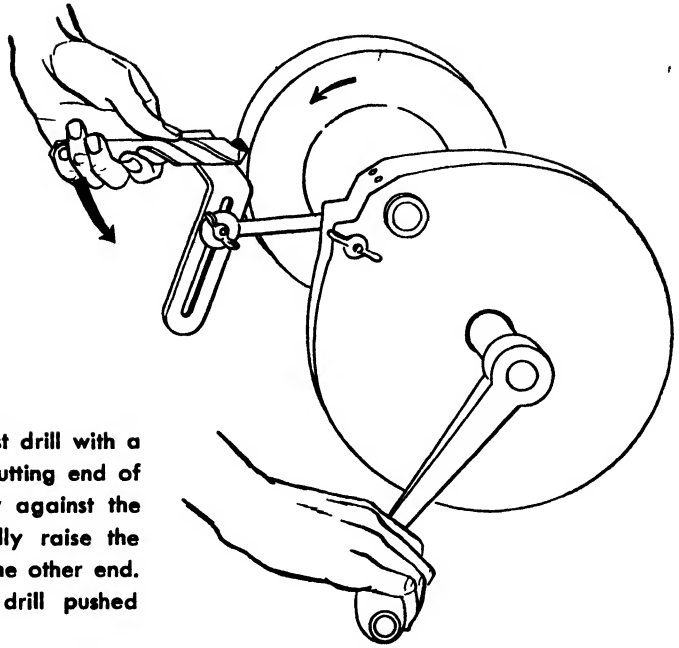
Grinding a twist drill with a hand grinder. Force the cutting end of the drill slowly but firmly against the revolving wheel. Gradually raise the cutting end by lowering the other end. Keep the point of the drill pushed against the wheel.
